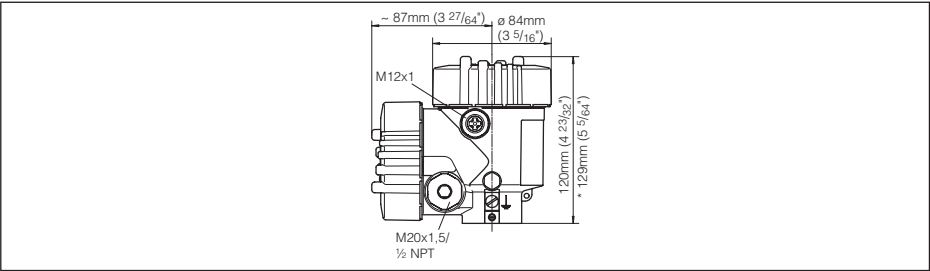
Double chamber housing (with integrated display and adjustment module the housing is 9 mm/0.35 in higher)
